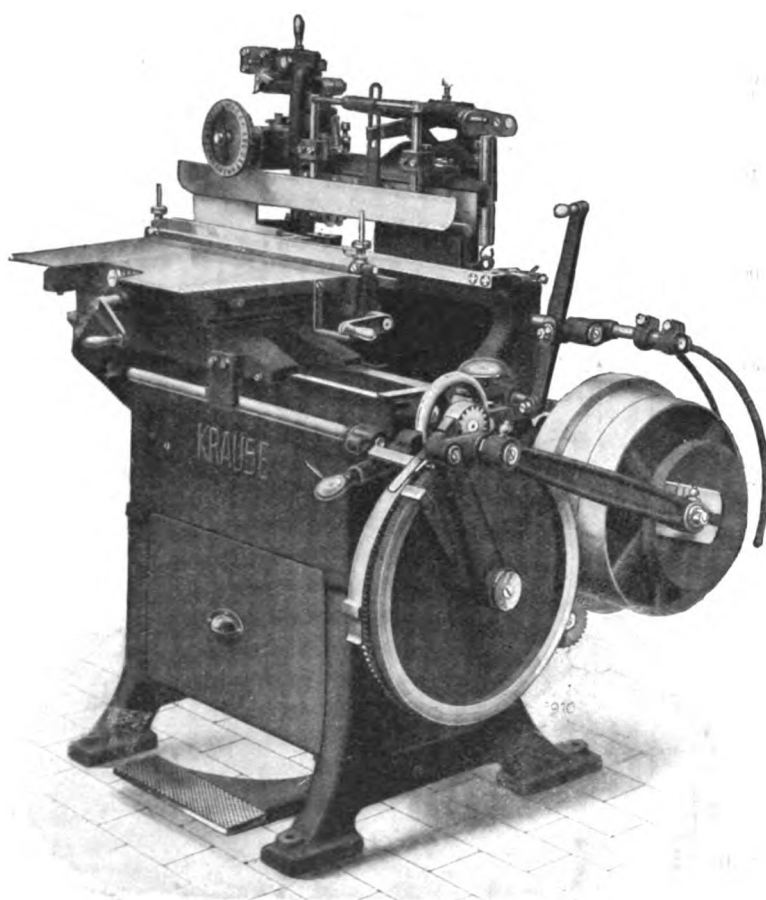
INDEXING, CUTTING AND PRINTING MACHINE WITH DIAL TO INDICATE LETTER PRINTED
